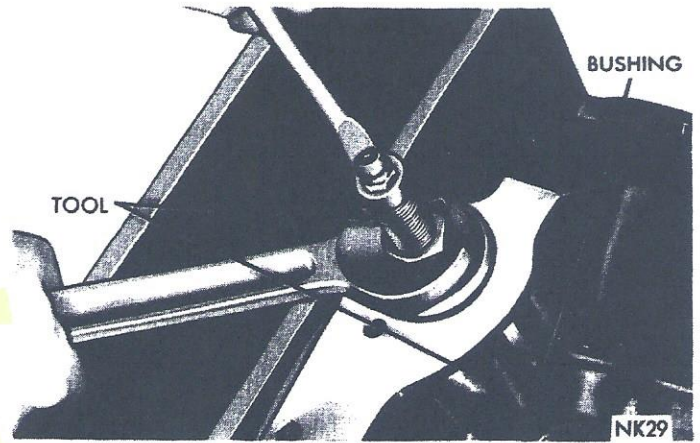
Burnishing Distributor Drive Shaft Bushing
